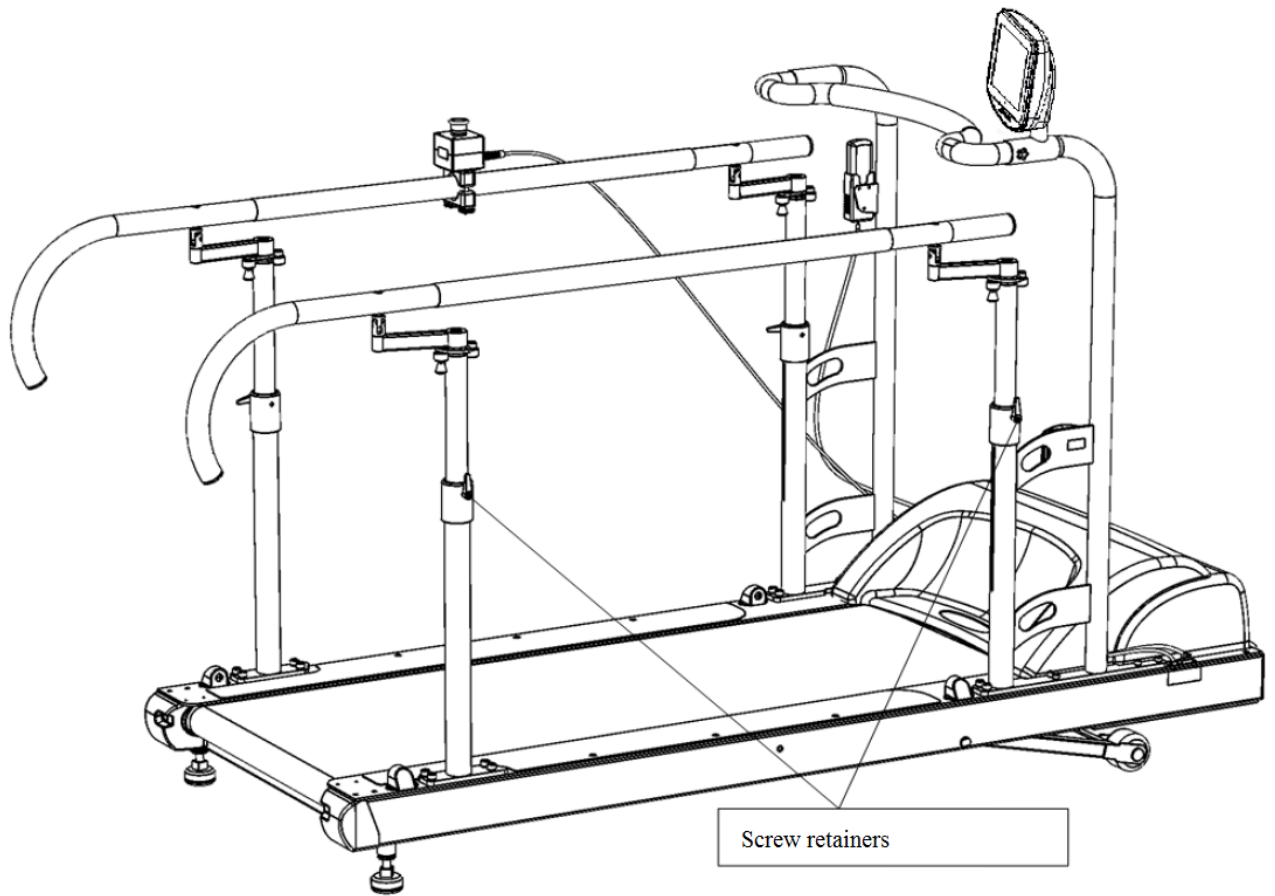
Location of adjustable handrail fasteners for height adjustment
